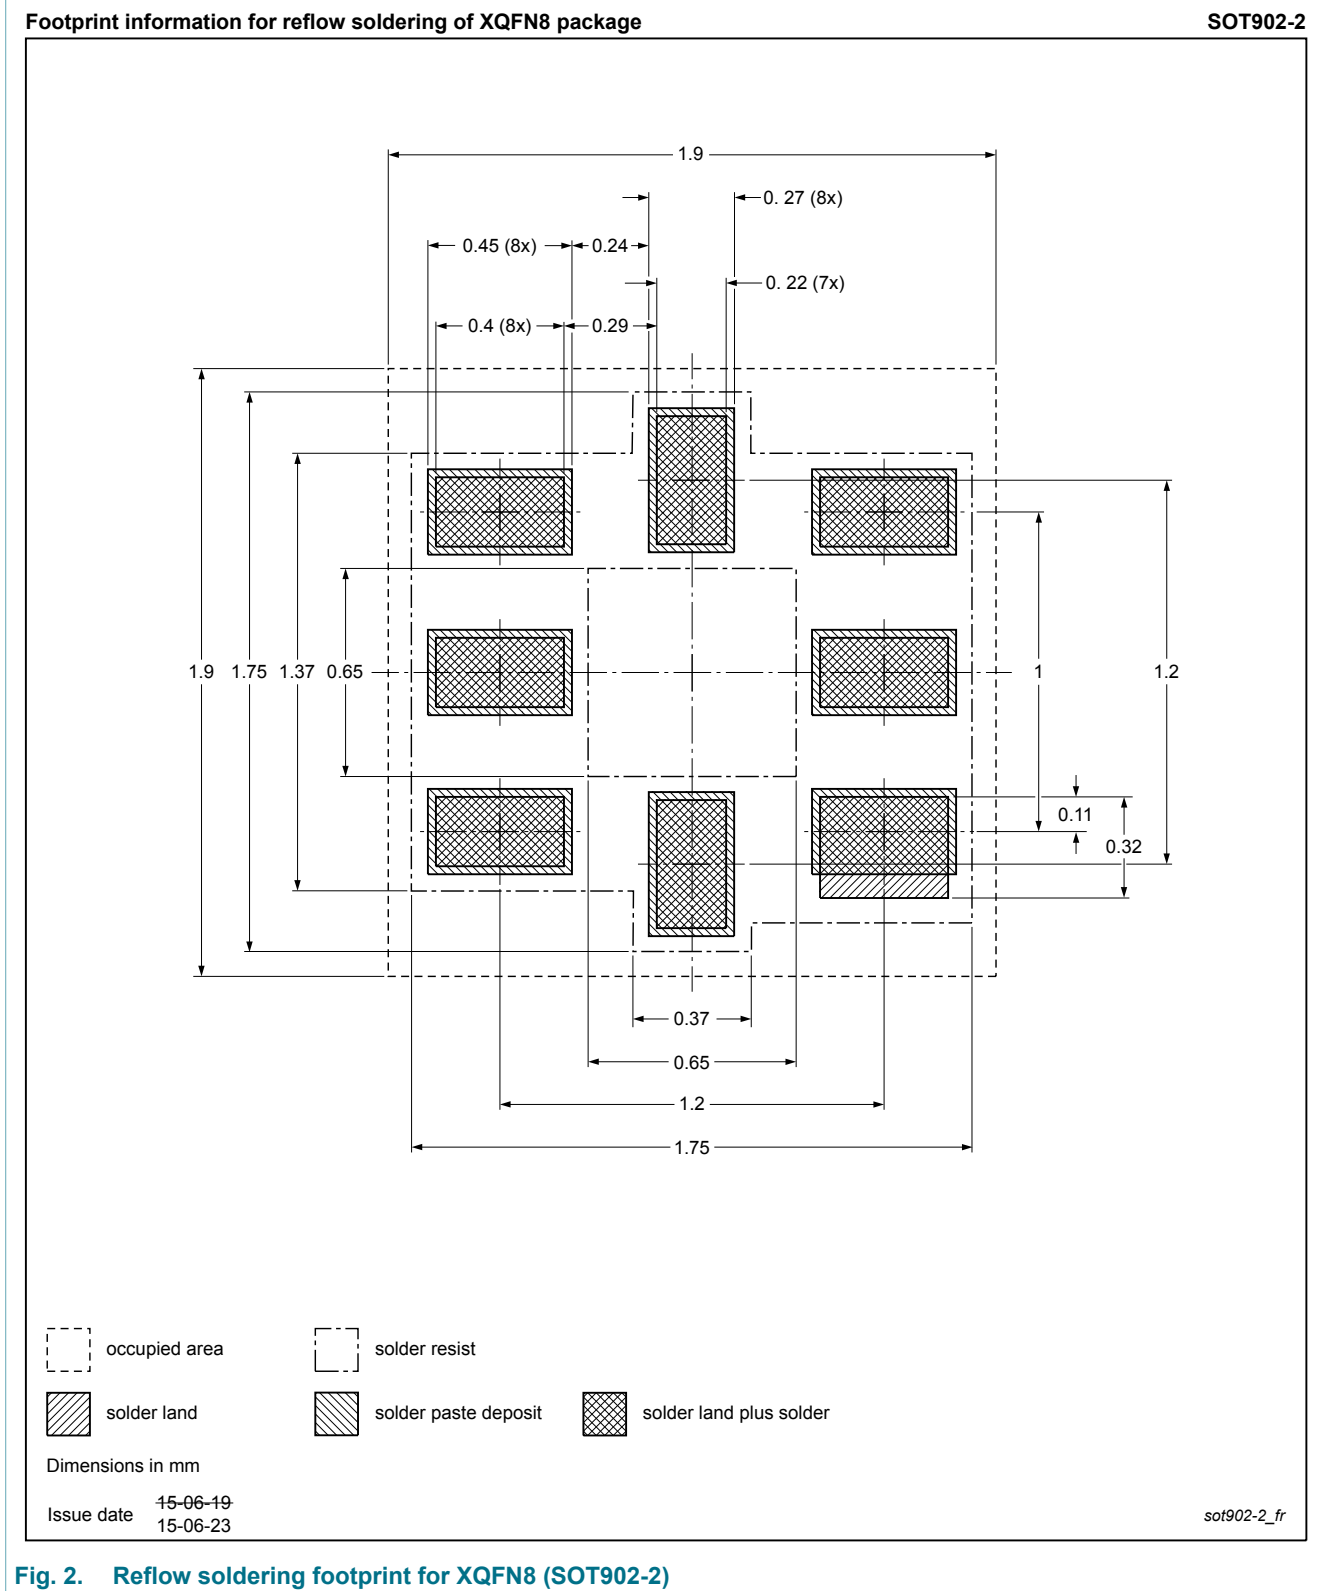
Reflow soldering footprint for XQFN8 (SOT902-2)
